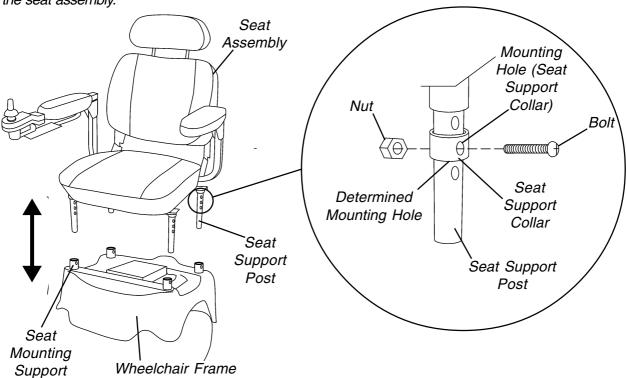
REMOVING/INSTALLING SEAT SUPPORT COLLARS
